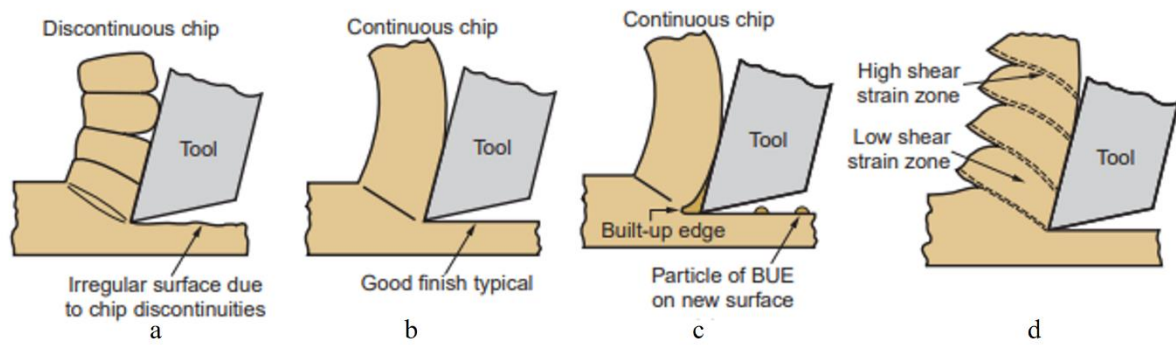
Various chip types formed during machining (a) Discontinuous (b) Continuous (c) Continuous chip with built-up edge (BUE) (d) Serrated [17]
